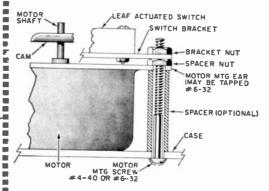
Use of spacer tube and nut will avoid risk of bending motor case and misaligning cam.
